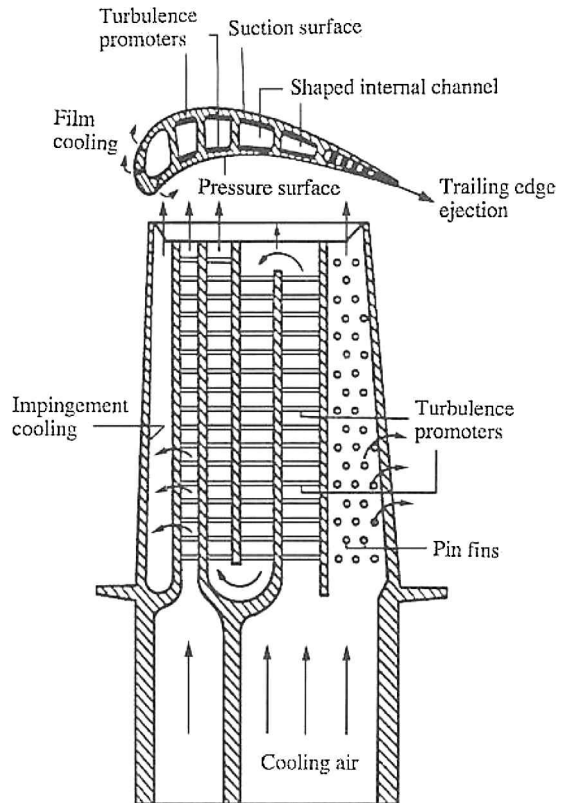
Typical internal cooling arrangement for a multipass turbine blade; from Han et al.<sup>1,2</sup>
